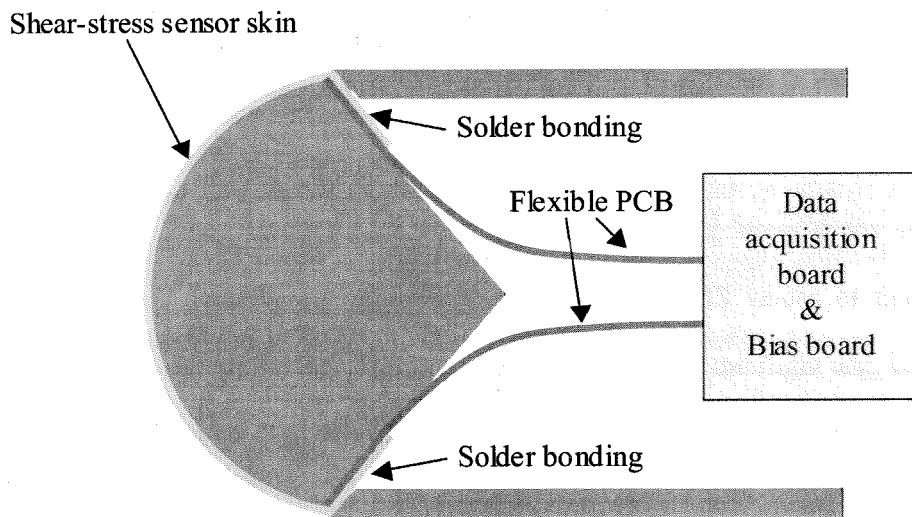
The packaging scheme of the sensor skin on the leading edge.
